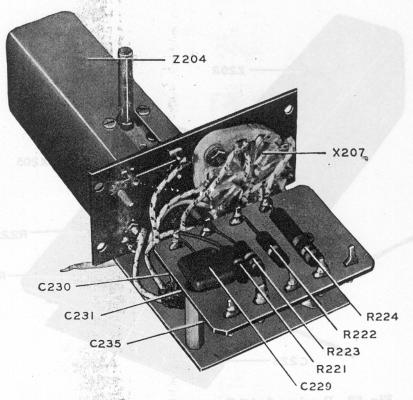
Receiver BFO and Audio Amp. Assembly—Bottom View
